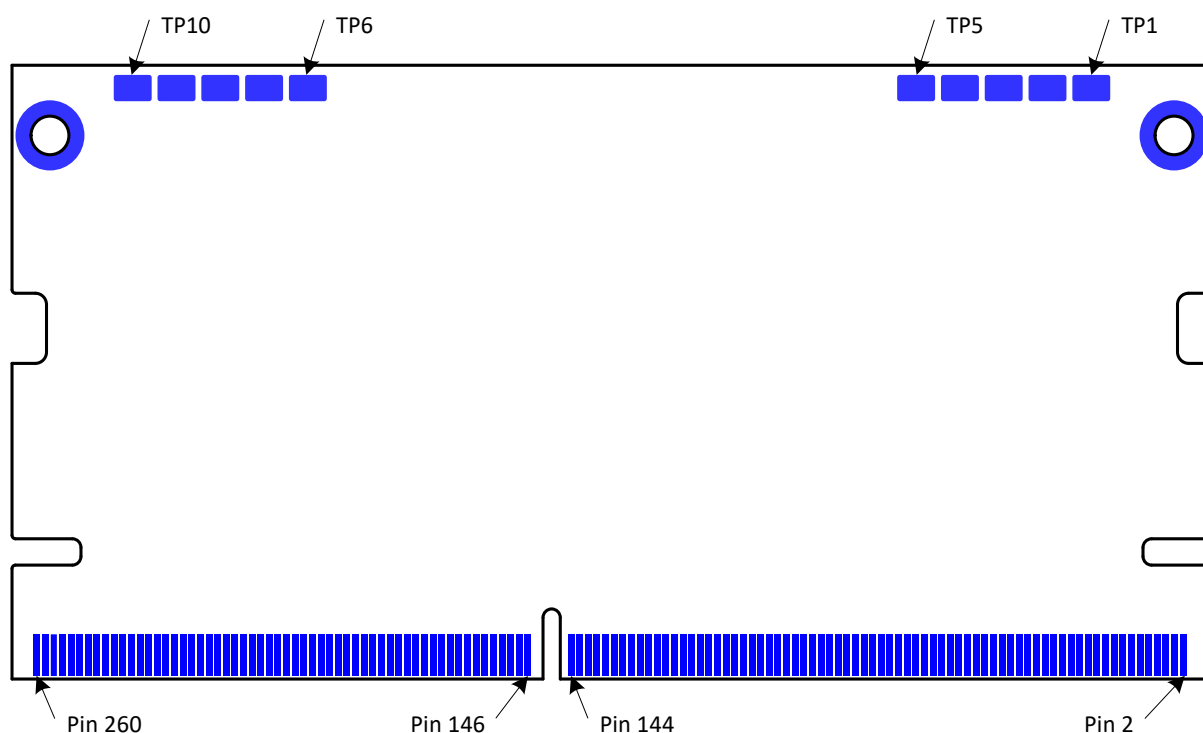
Pin numbering schema on the bottom side of the module (bottom view)
